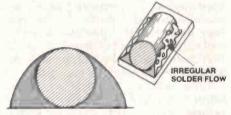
When poor wetting occurs, the solder meets one surface at an abrupt angle and the solder flows irregularly.
